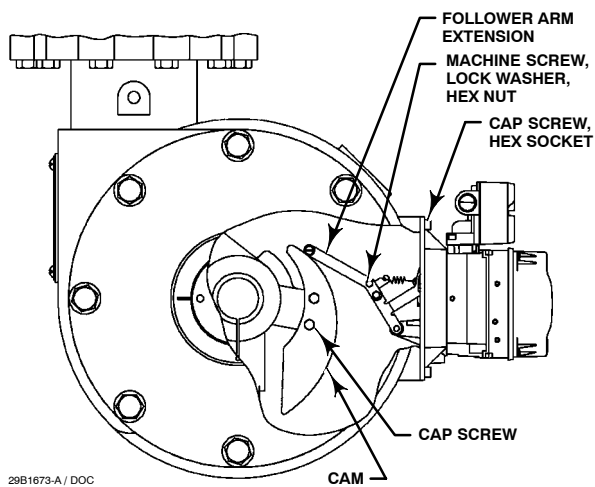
Type DVC6020 Digital Valve Controller with Long Feedback Arm and Follower Arm Extension Mounted on a Rotary Actuator
